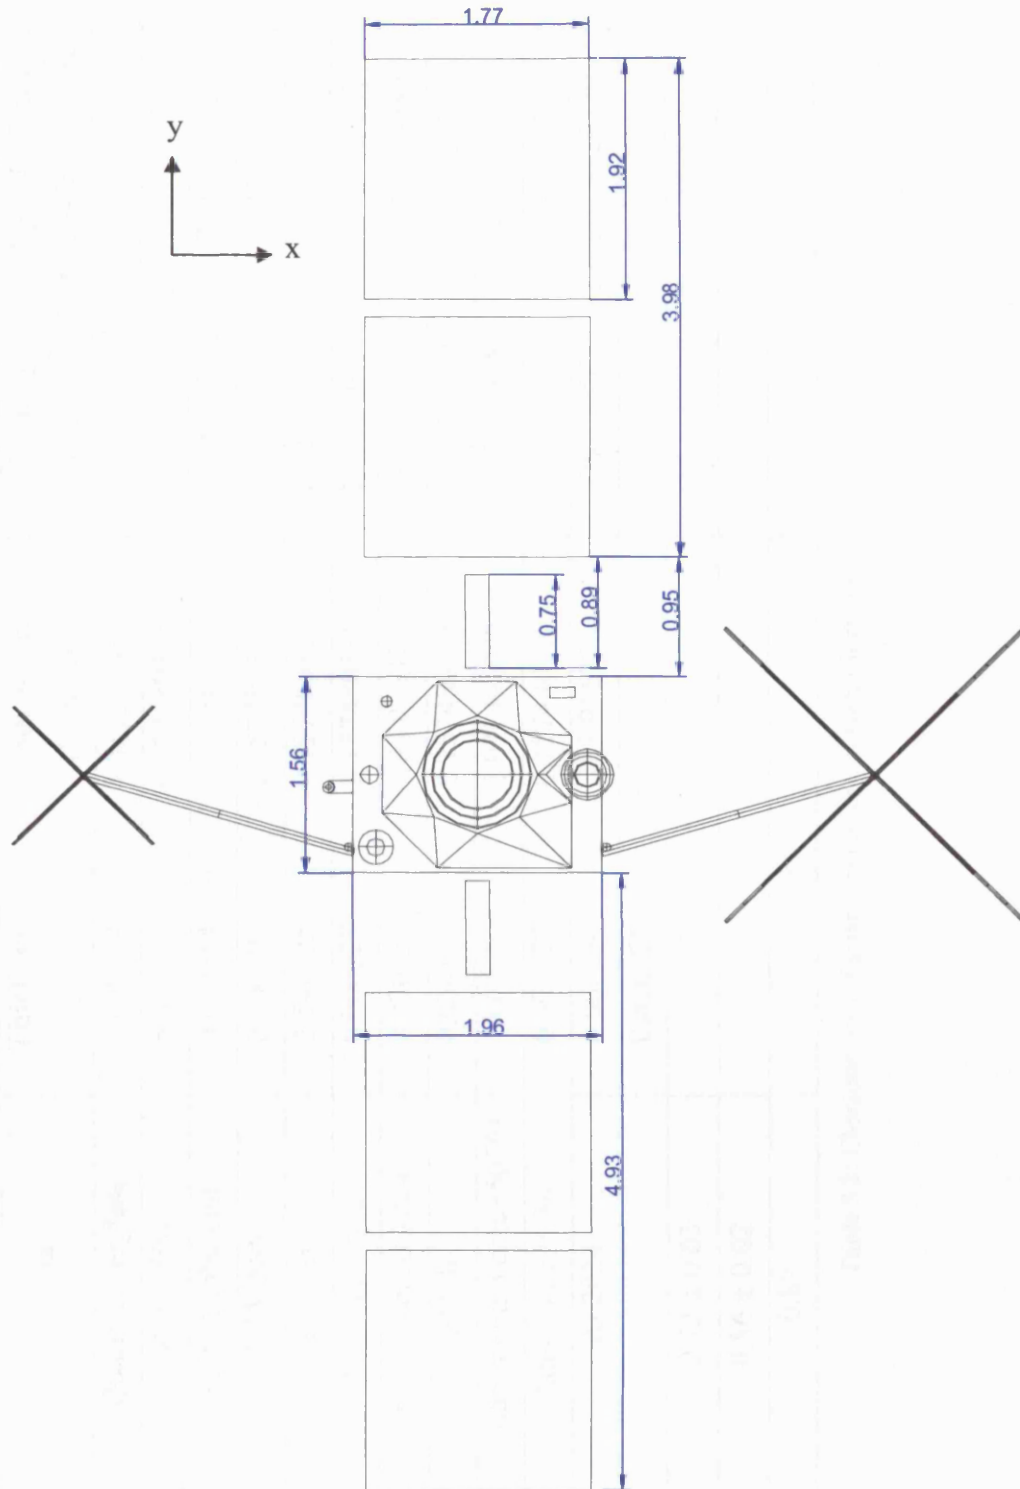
Technical drawing of GPS Block IIR (dimensions are in metres)
